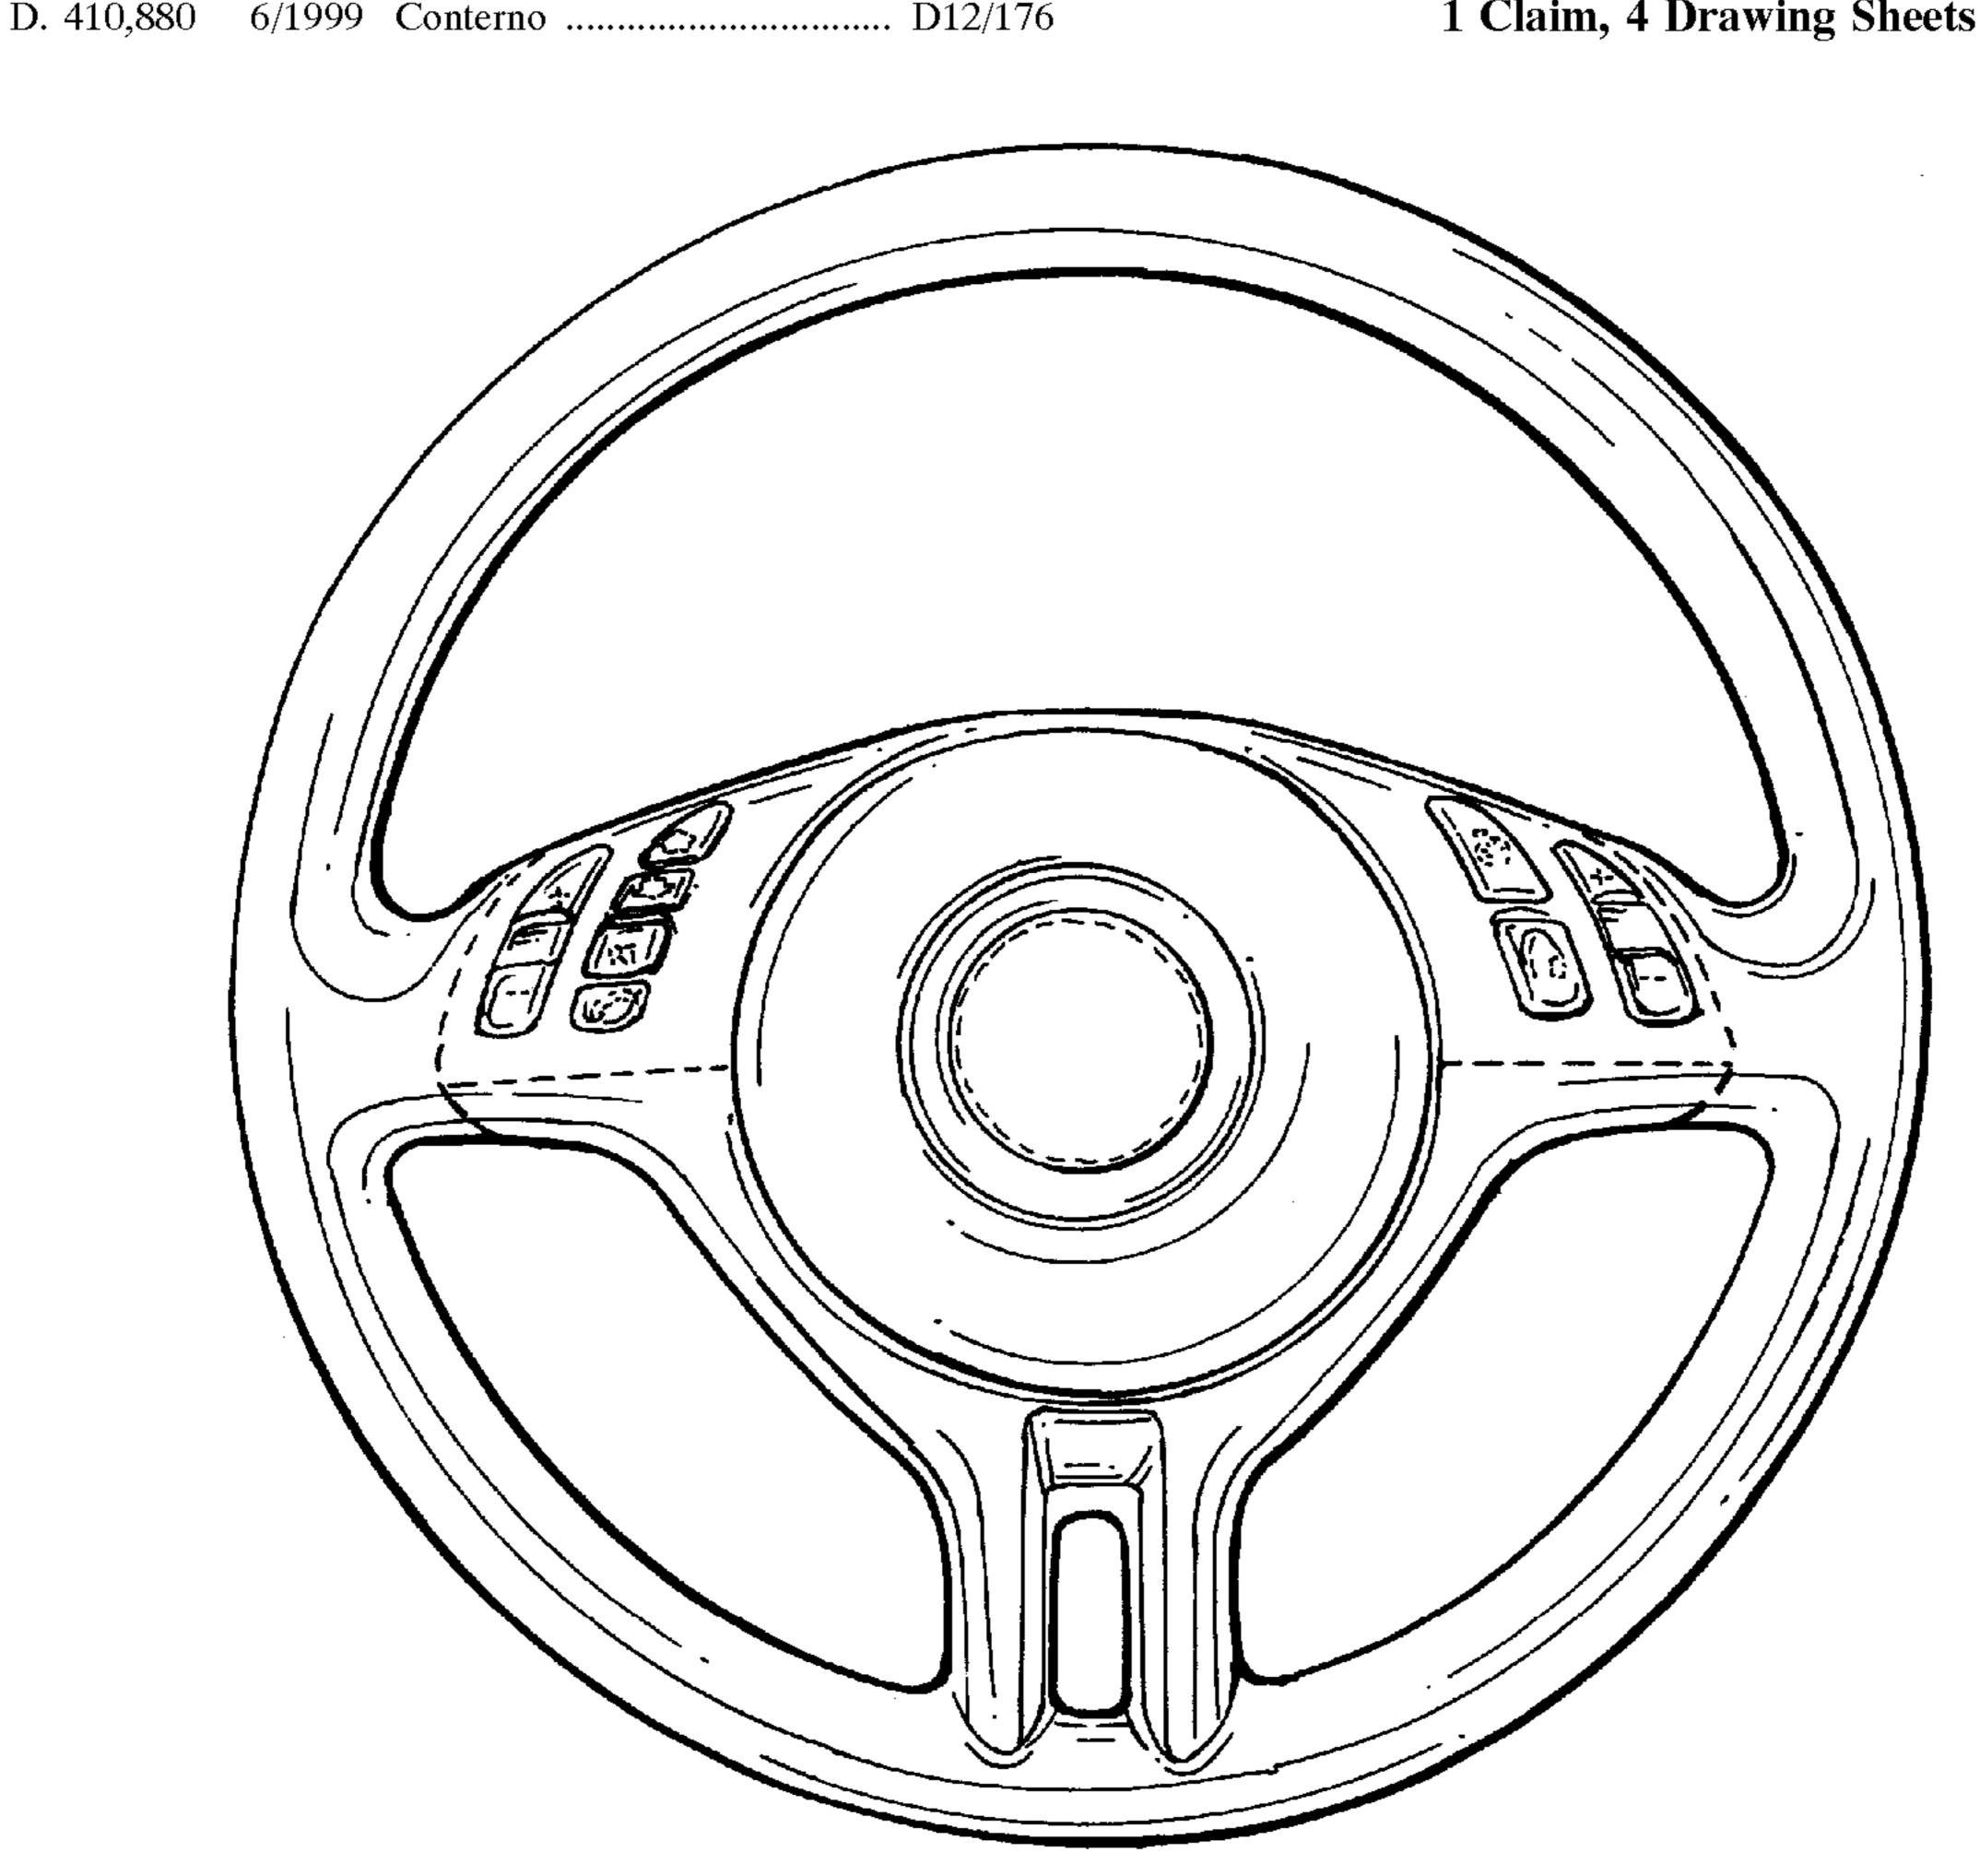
is a perspective view from the top of a steering wheel for a vehicle according to my novel design;
